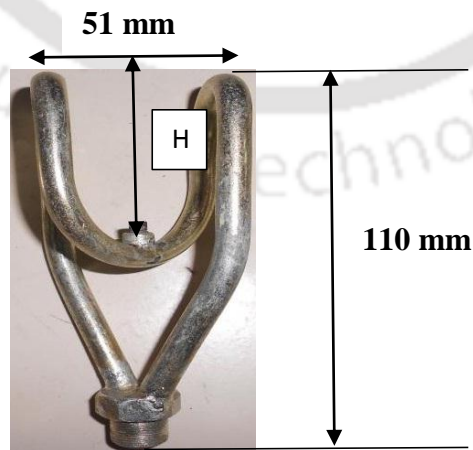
Modified vaporizer tube with dimension (H = 45 mm).
